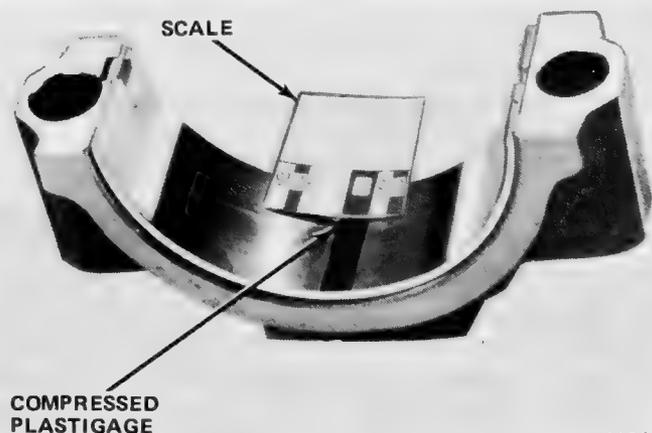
B-105 Bearing Clearance Measurement with Plastigage
